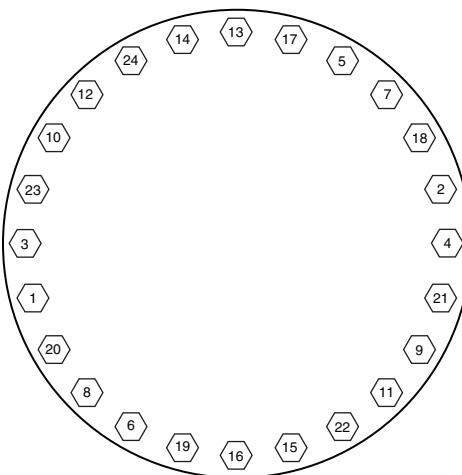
Cooler 325-400 and Condenser 225-400 Head Recommended Bolt Torque Sequence
